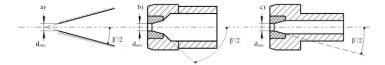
Cross-sectional view of the inlet section of the nozzle part of the hydro-cutting jet-forming head:
